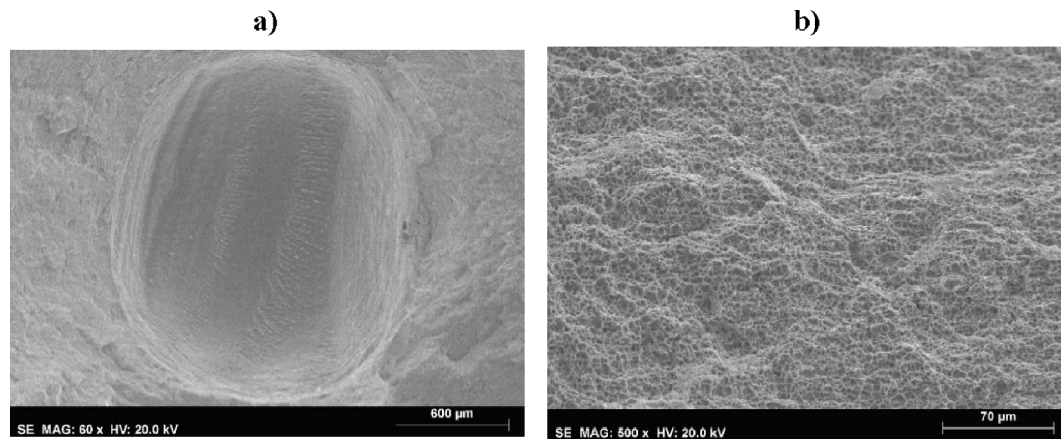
Fracture surface features of a) 5H top and b) 3L bottom specimens.
